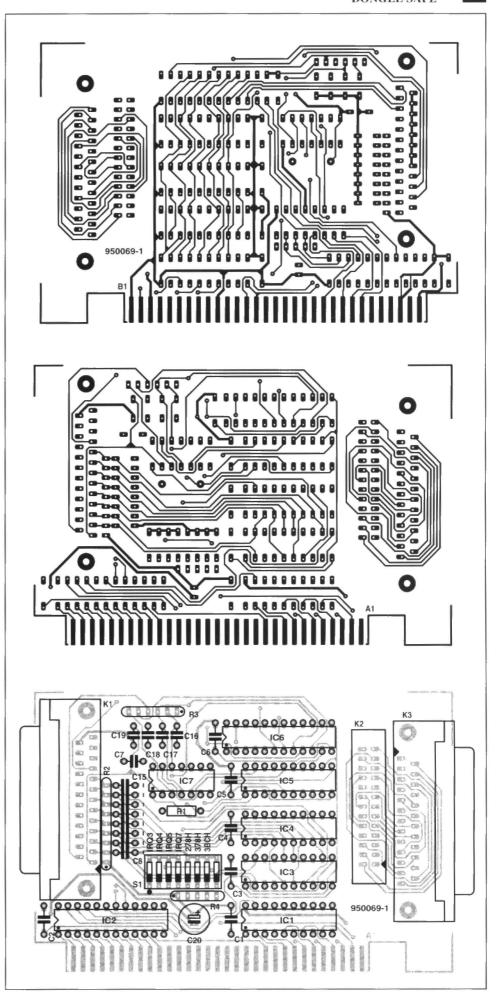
Copper layouts and component mounting plan of the double-sided through-plated printed circuit board designed for the dongle safe card (board available ready-made through the Readers Services, see page 70).
